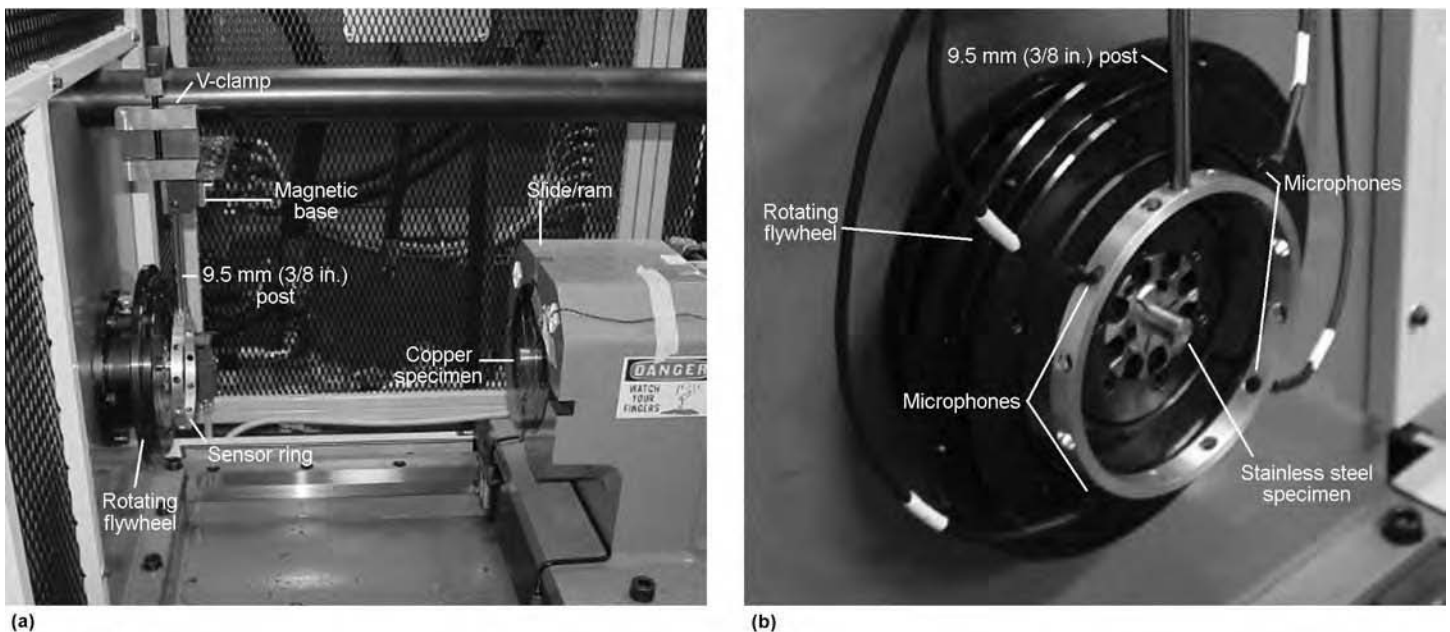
The free-standing acoustic-ring assembly contains four equally-spaced microphones that surround the weld interface. For reference, a 12.7 mm (0.5 in.) diameter type 304L stainless steel bar is located in the rotating fixture of the inertia welding machine.
